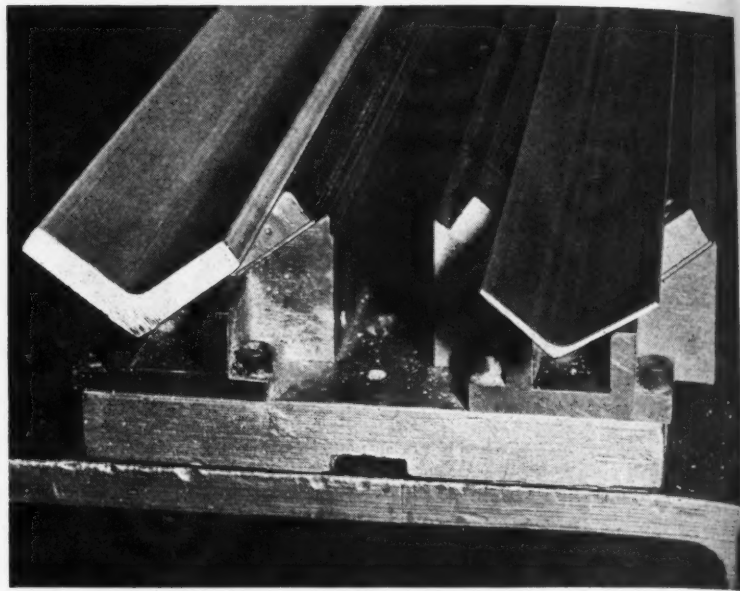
Fixture Designed to Hold Two V-shaped Cap Strips Side by Side. Right-hand Cap Strip has been Milled; Left-hand Cap Strip has Not
